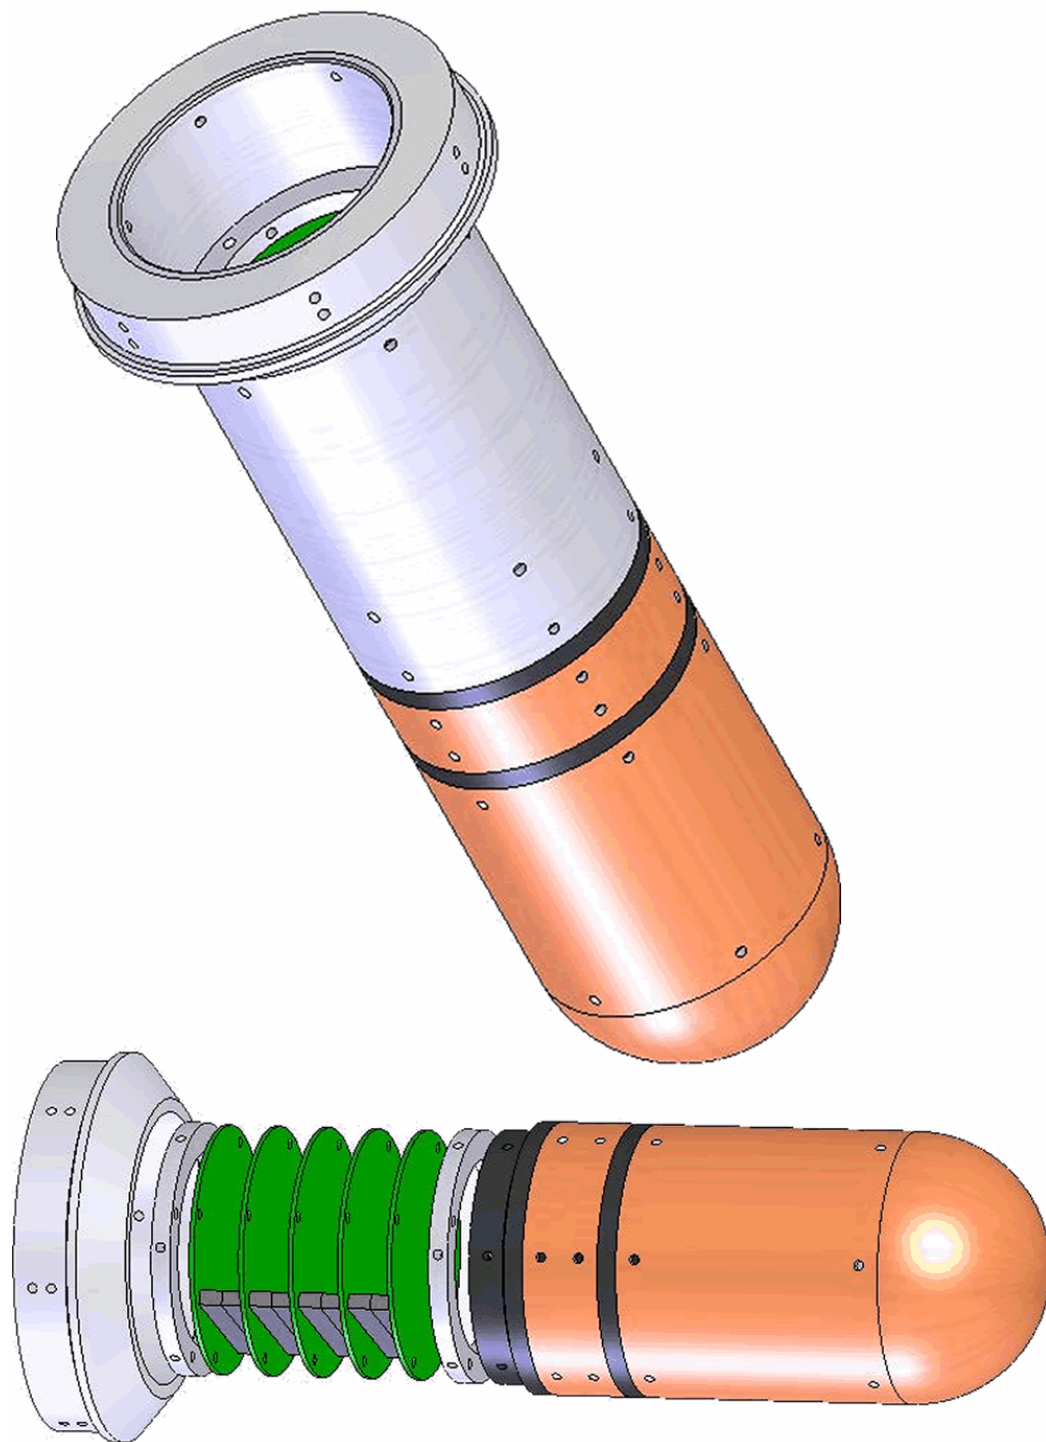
Assembled instrument and arrangement of the internal electronics
